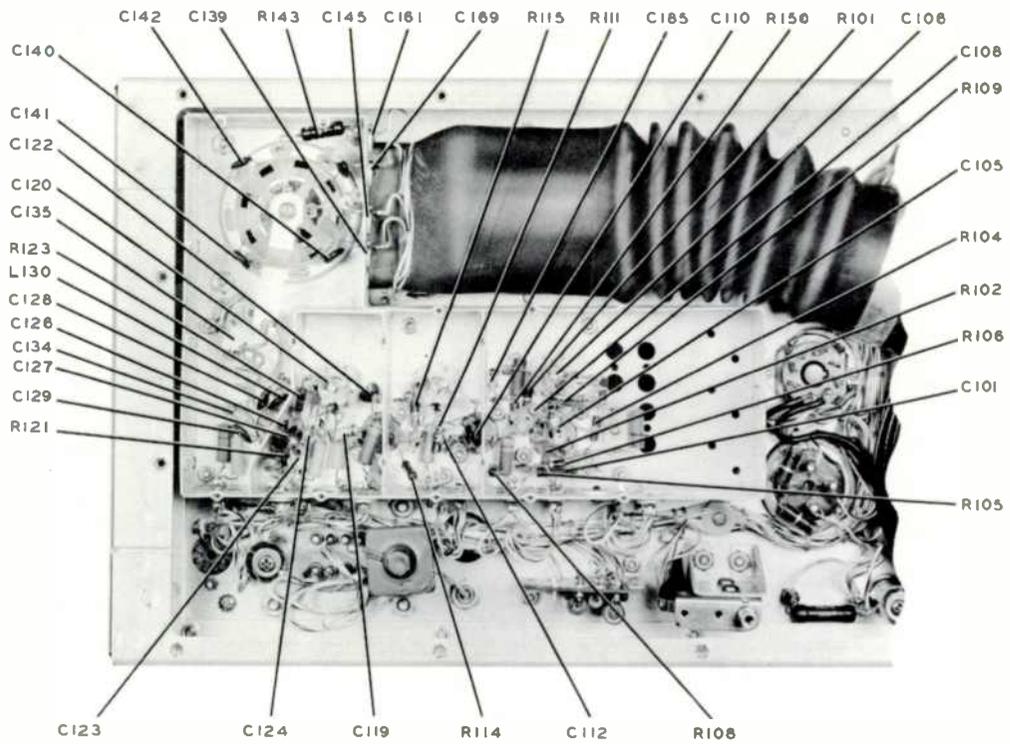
R-F Unit Subassembly, Cover Plate Removed
